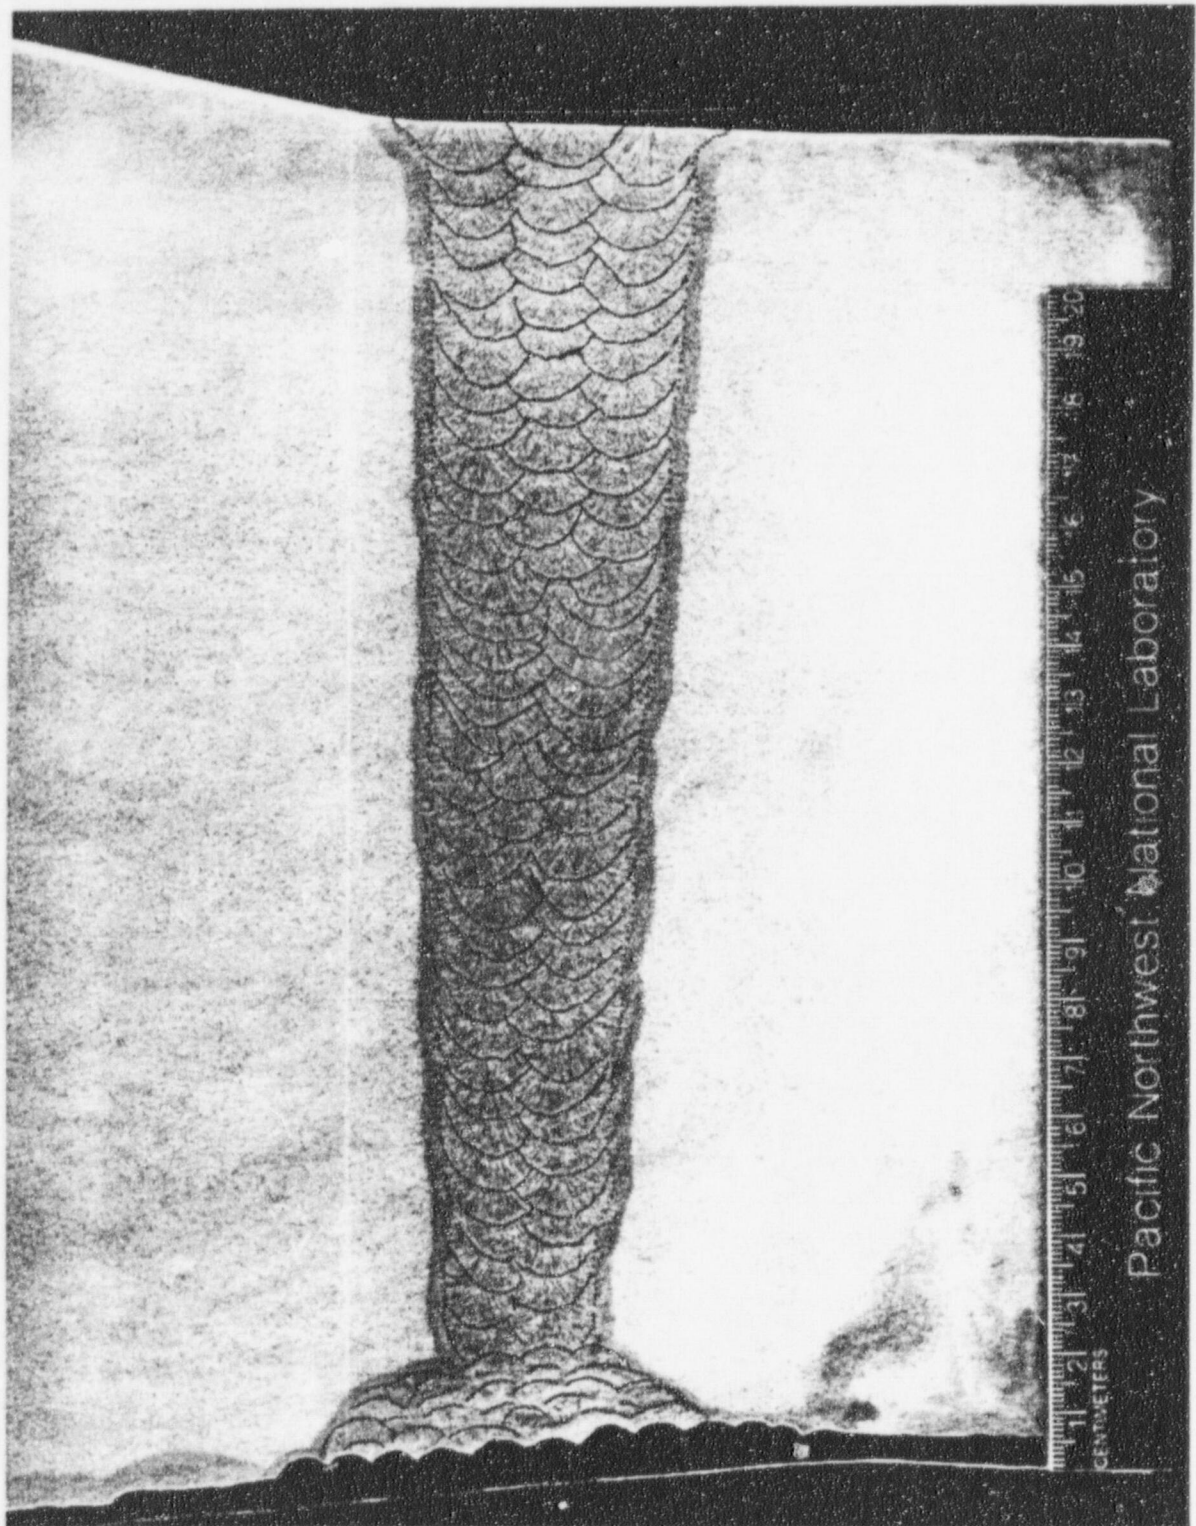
Single V Weld with Highlighted Weld Passes
